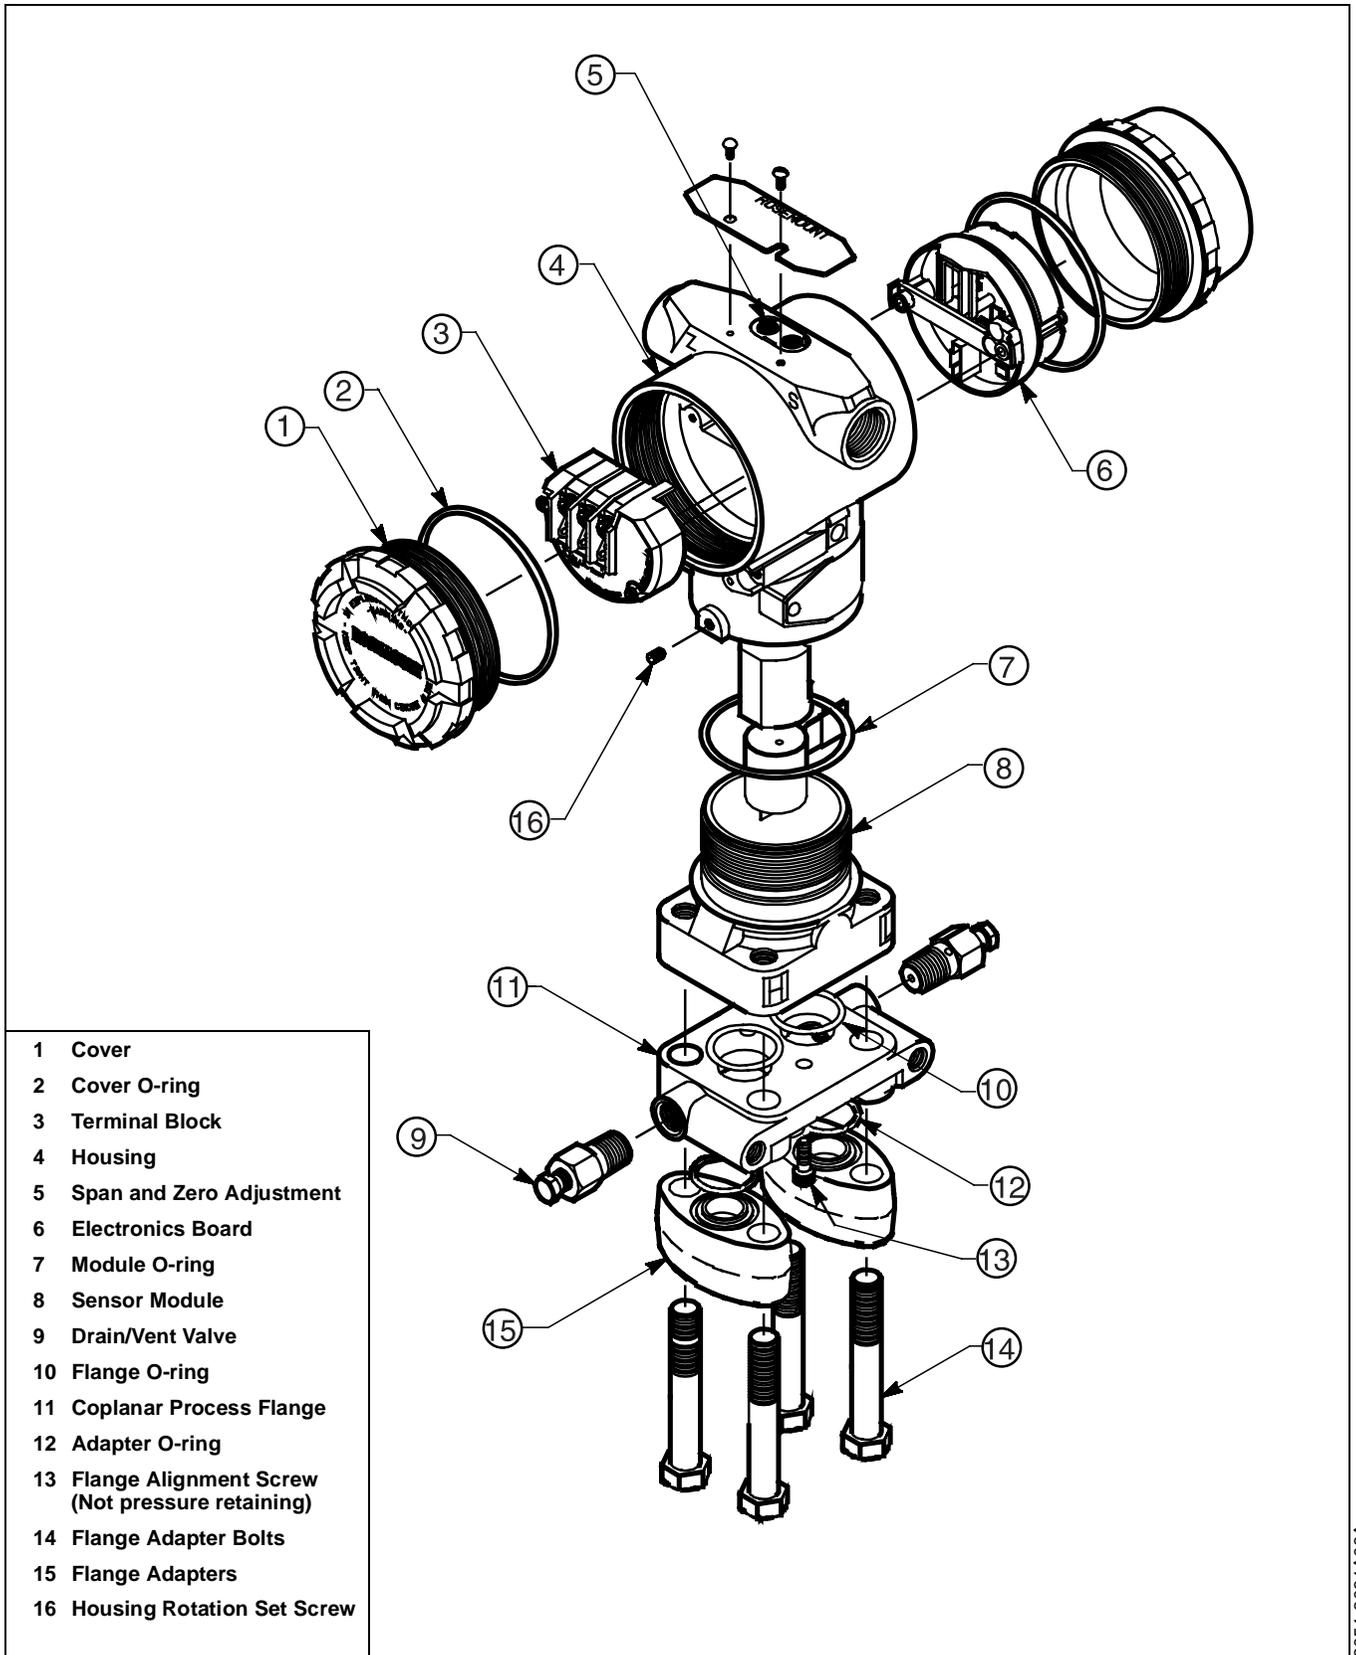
Model 3051C Exploded View (with Coplanar Flange).
